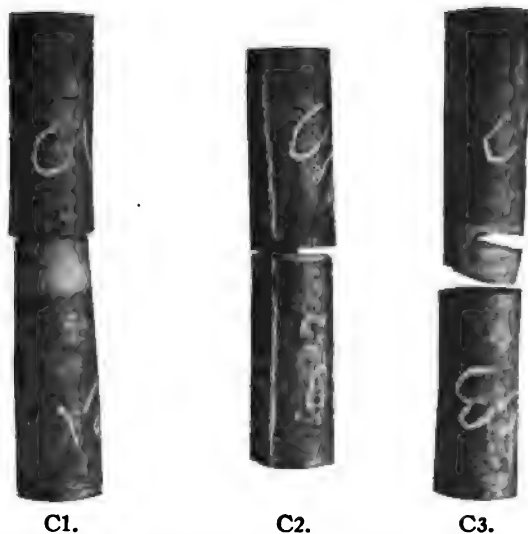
Old End, Cold-Drawn Steel; New End, Spellerized Steel.
